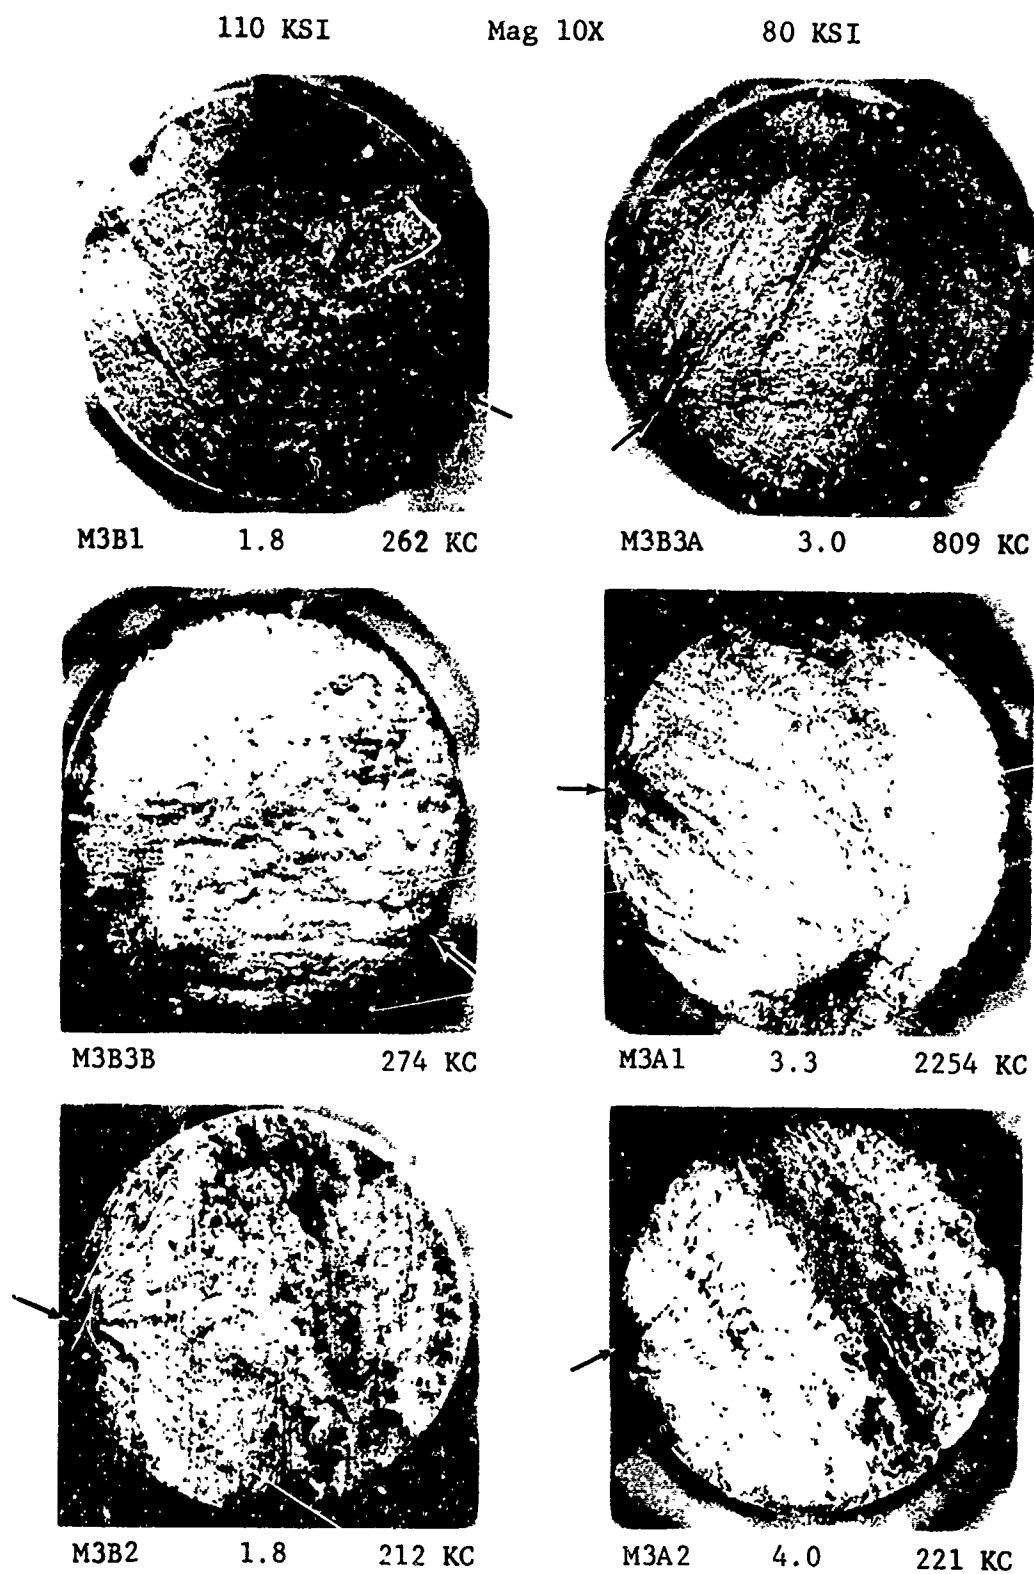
Fracture Surfaces of Failed Fatigue Specimens Series M3-Single Joint Optimum Diffusion Bonded with No Intentional Defects
